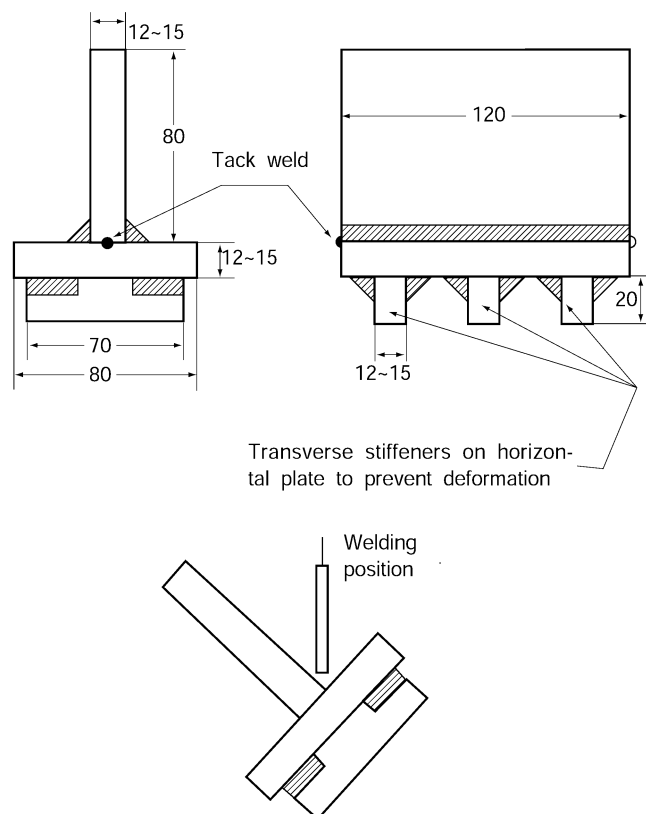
Hot Cracking Test Assemblies (Units : mm)
